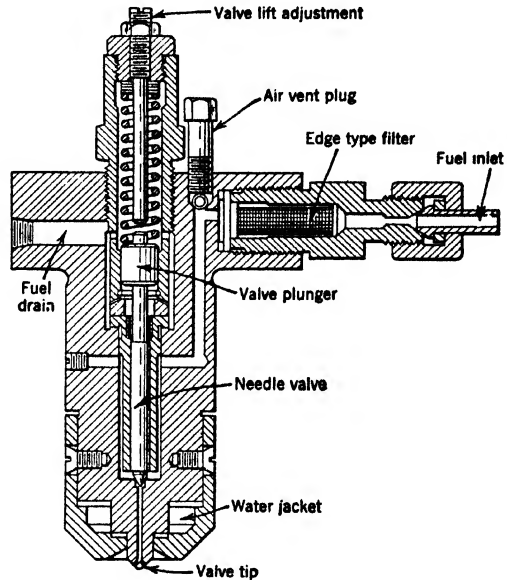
Fairbanks-Morse closed-type fuel-injection nozzle.
